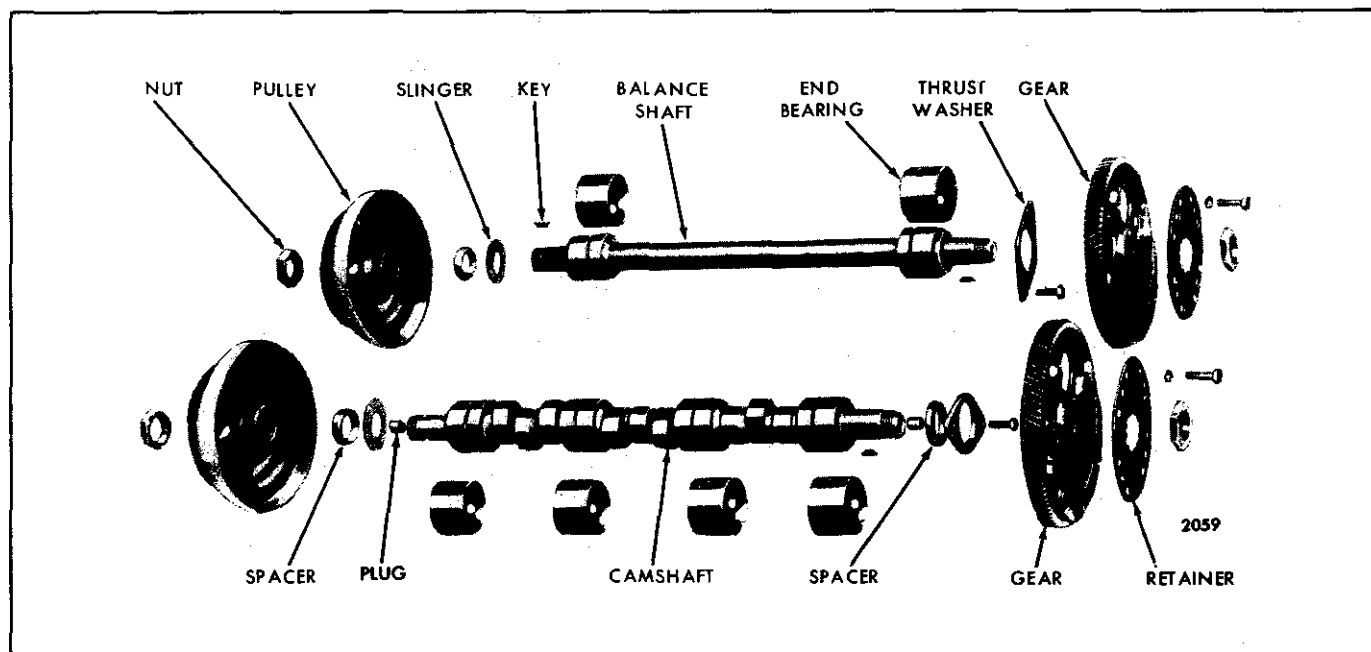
Camshaft and Balance Shaft Details and Relative Location of Parts
